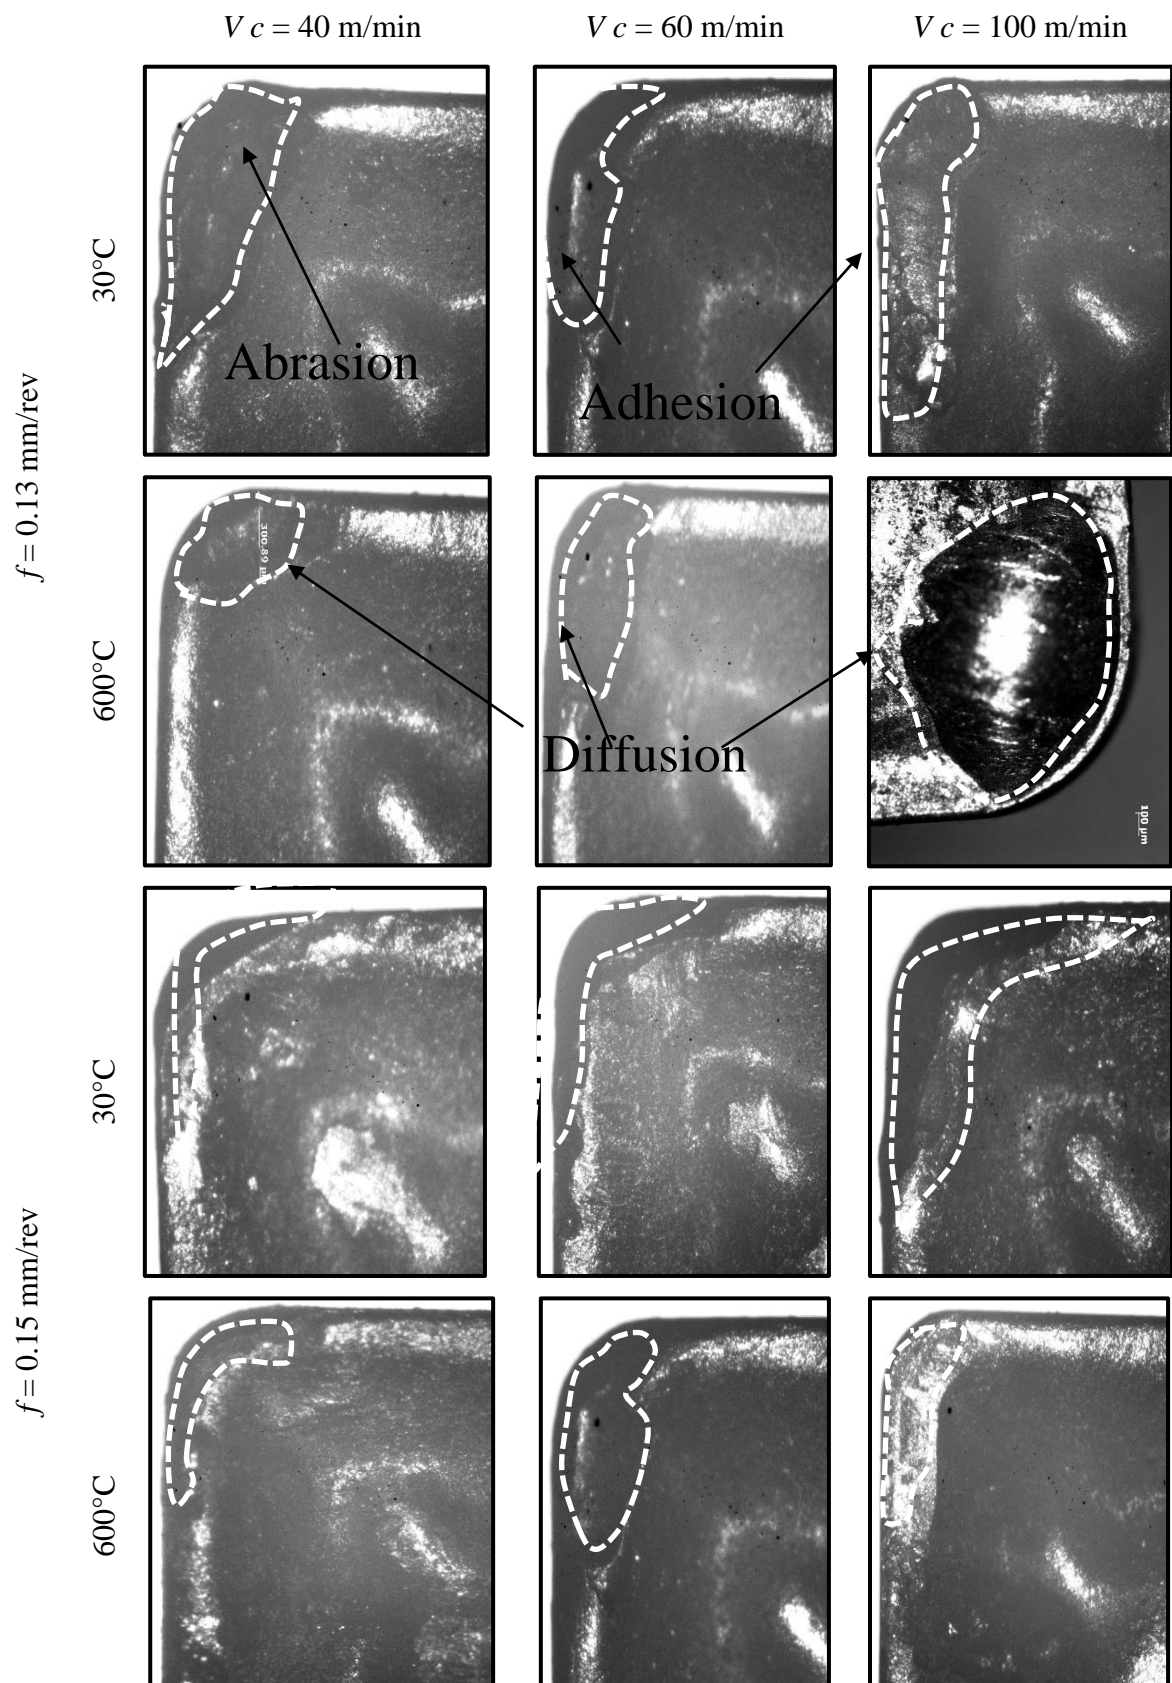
Tool wear at different conditions of machining of Inconel 718
